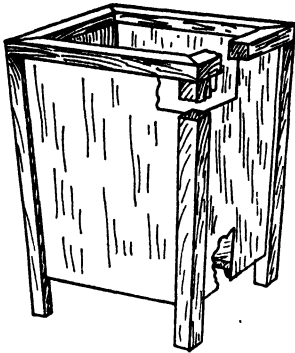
Prob. 287. Make a working drawing of the *telephone stand*. Supply details and dimensions not shown.
